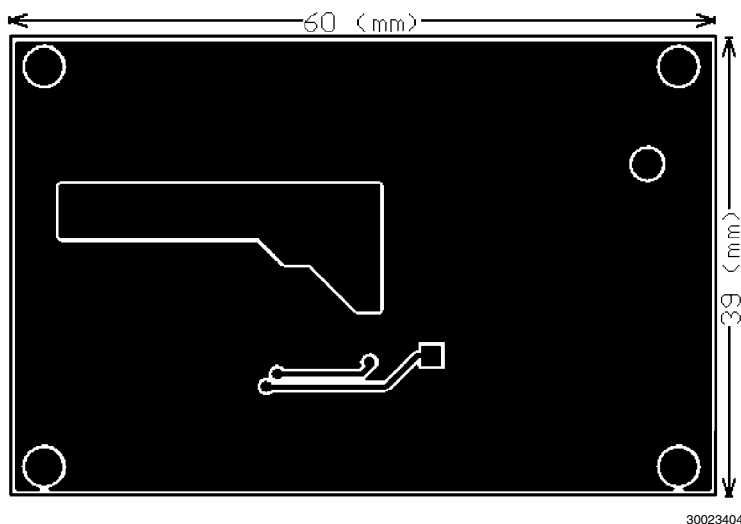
LM3102 Demonstration Board PCB Bottom View
